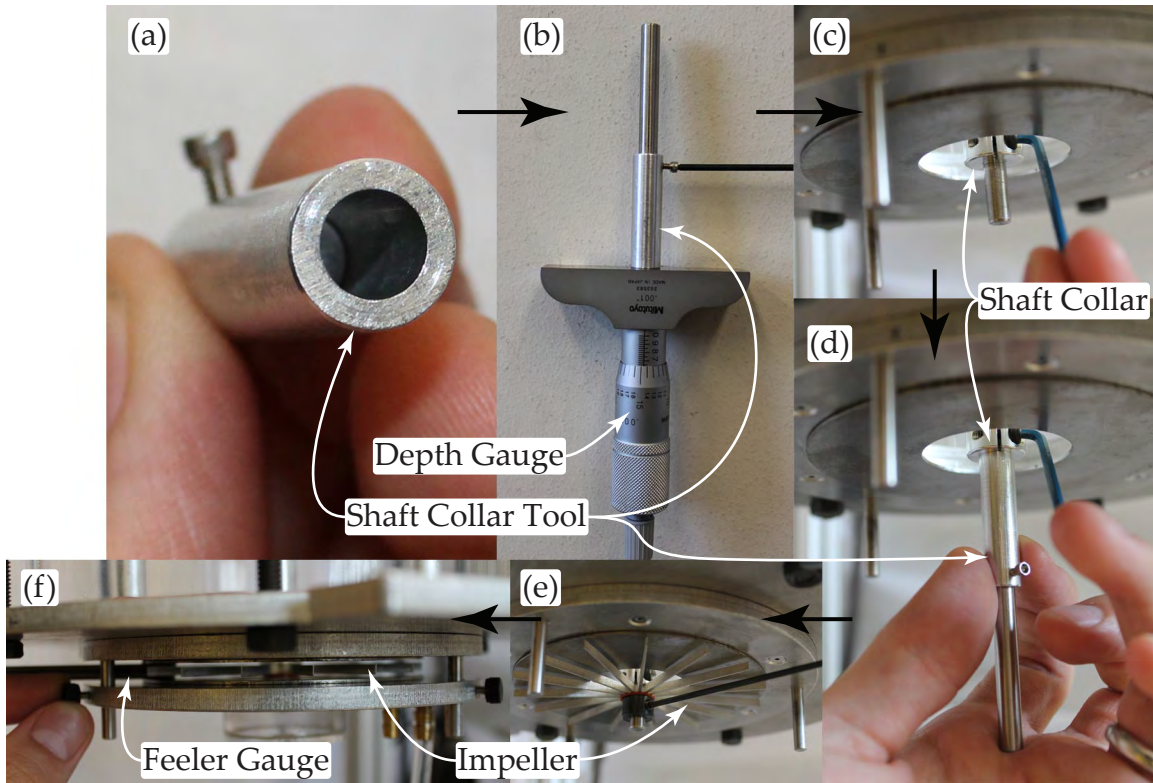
Accurate placement of the impeller between the stators was very important, especially when the fill ratio was high. (a) A custom built shaft collar tool made the impeller placement systematic and accurate. (b) The depth of the well in the shaft collar tool was set by placing it over a depth gauge set to the desired shaft collar installation length. (c) The shaft collar defining the impeller position was loosened, and (d) locked in place after its position was set by placing the shaft collar tool on the end of the shaft. (e) The impeller was installed on the shaft, and a second shaft collar underneath the impeller locked it in place. (f) Feeler gauges were used to set the stator gap breadth; the three thumb screws were tightened, setting the gap breadth to the thickness of the feeler gauges.
